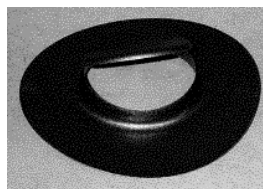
Deep drawing of a 180 mm blank into a 79 mm cup
